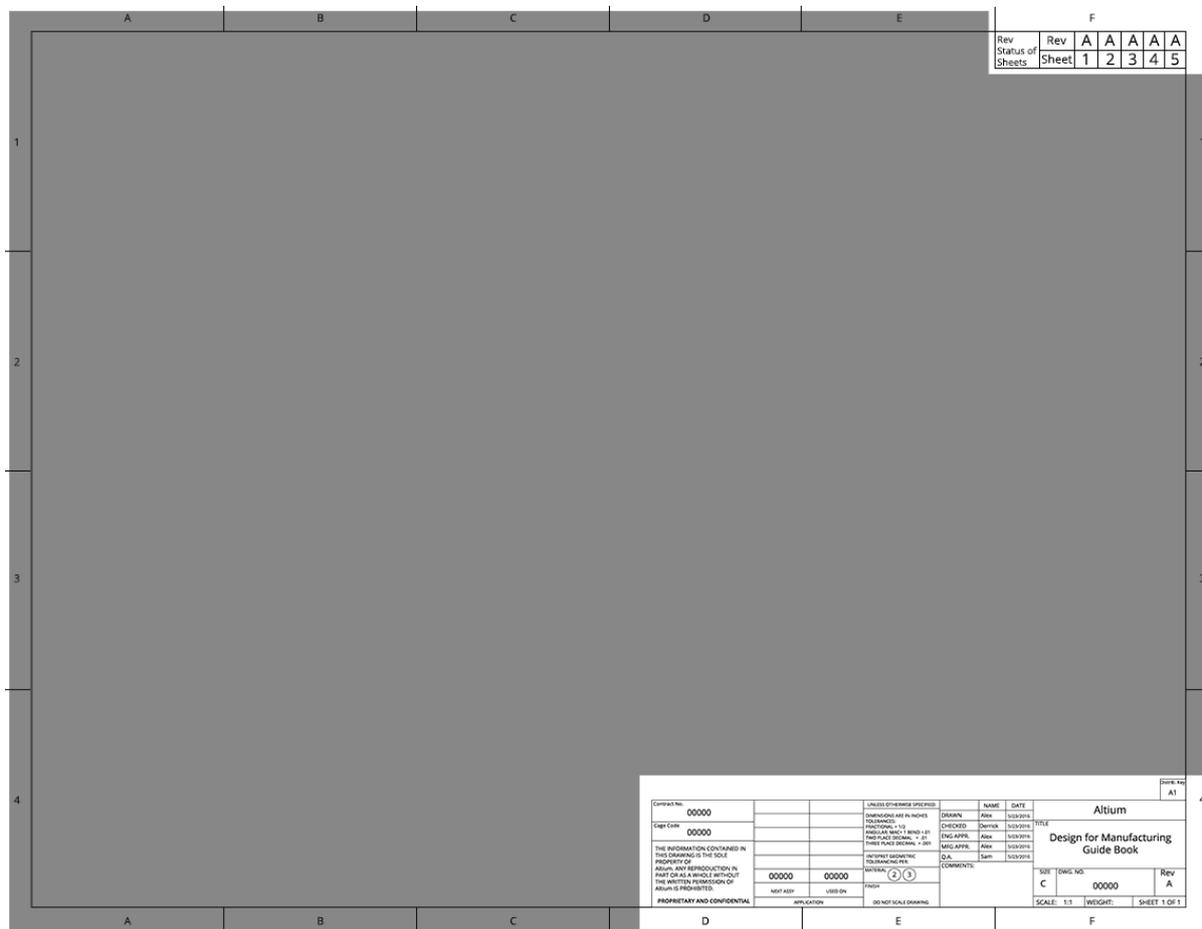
Blank PCB Drawing Space with Highlighted Blocks
